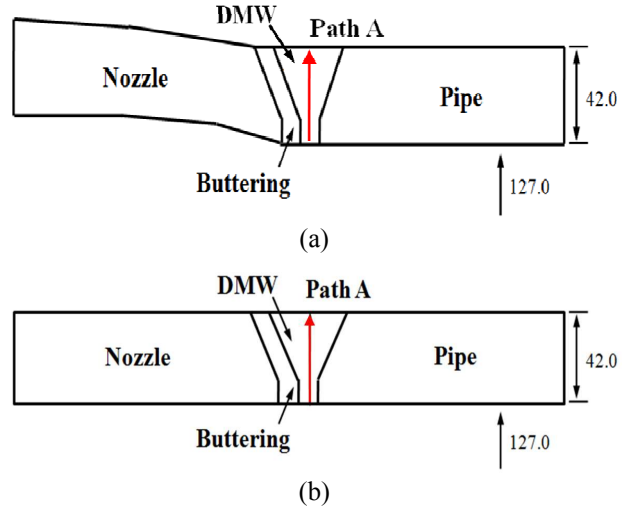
The geometry and materials of (a) an austenitic pipe butt weld in Ref.[1] and (b) simplified austenitic pipe butt weld(units : mm)
